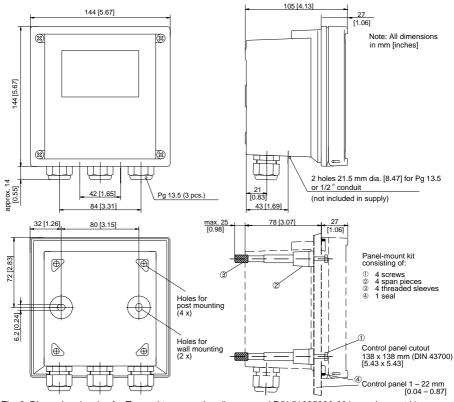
Dimension drawing for Transmitter, mounting diagram and P/N 51205990-001 panel-mount kit
